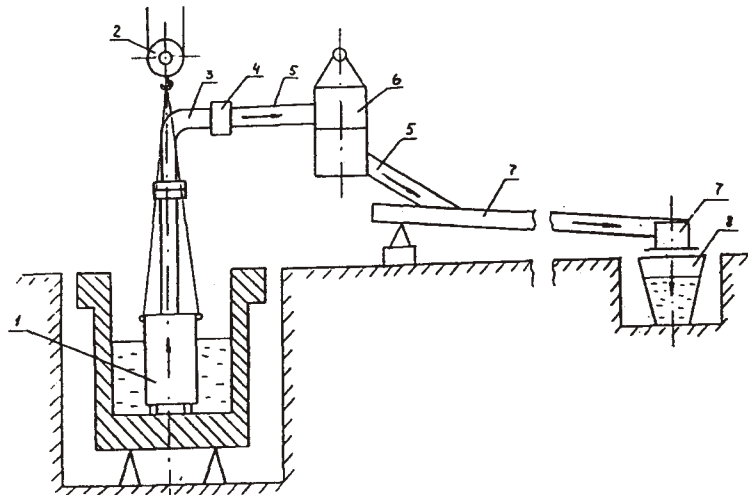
Scheme of the immersible MHD pump system for transferring aluminum-zinc alloy in the coating workshop, at the "Everstal" Plant. 1 – MHD pump; 2 – suspension bracket unit; 3 – knee; 4 – flange connection; 5 – chutes; 6 – storage; 7 – trays; 8 – moulds.
